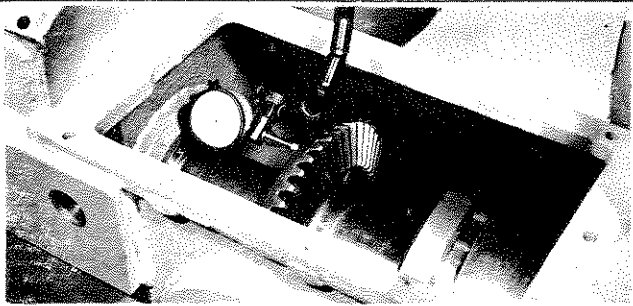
Reassembly And Installation Of Bevel Gear Shaft Assembly (Sheet 3 of 4)
